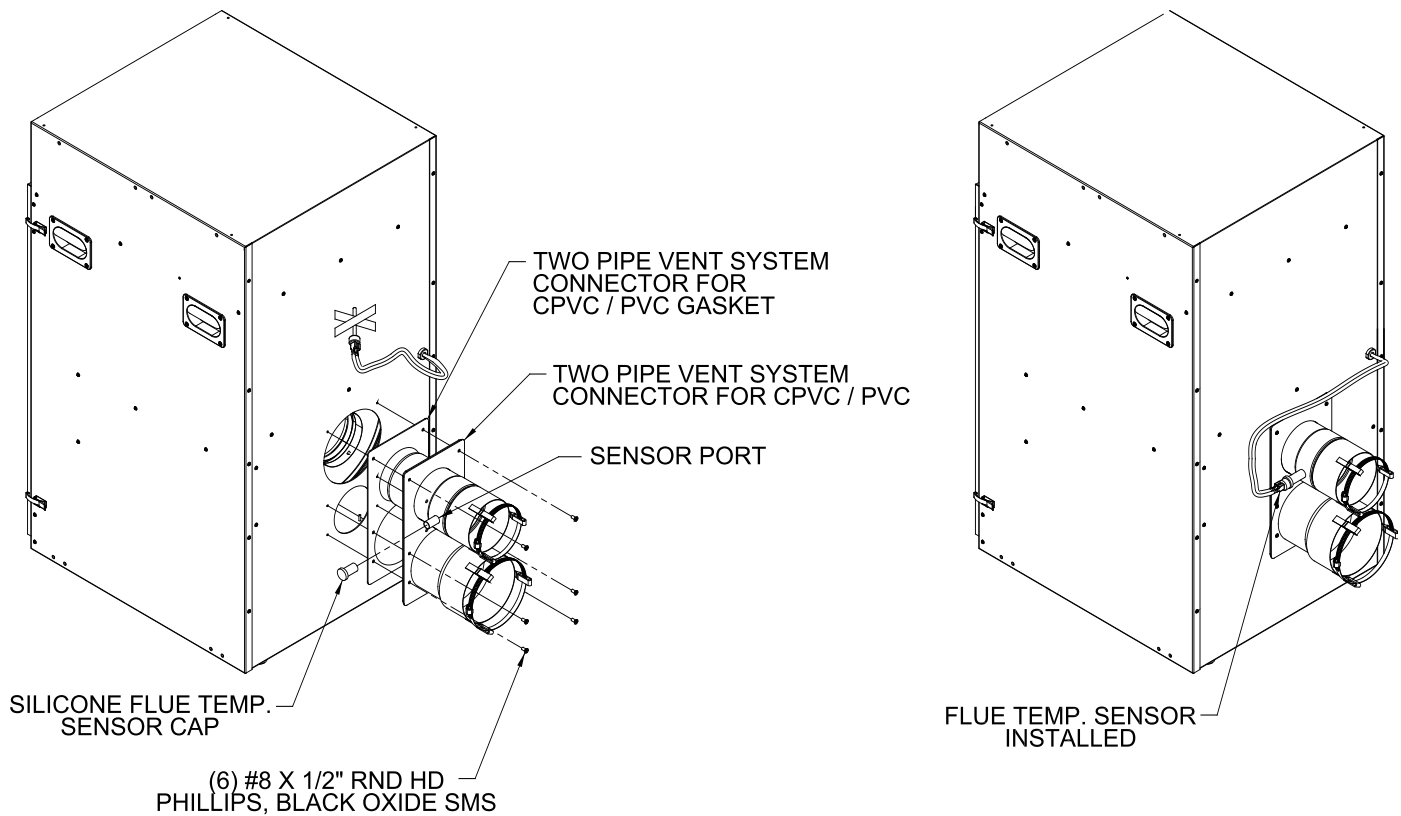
Field Installation of Two Pipe Vent System Connector for CPVC/PVC
